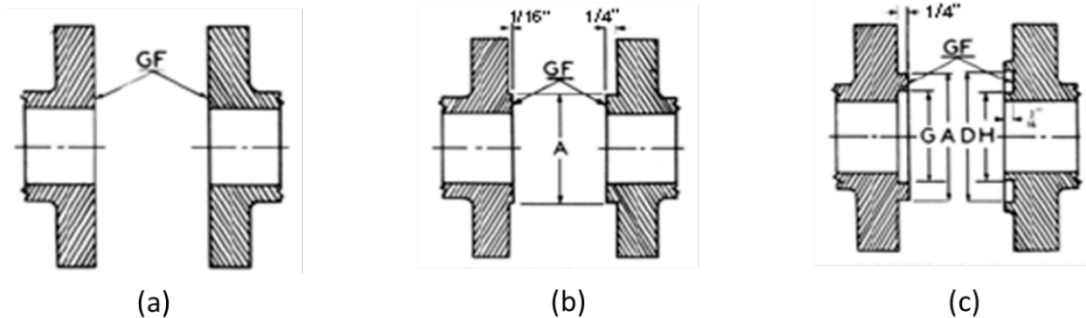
Example flange face types [119]. (a) Flat Face. (b) Raised Face. (c) Tongue and Groove face.
